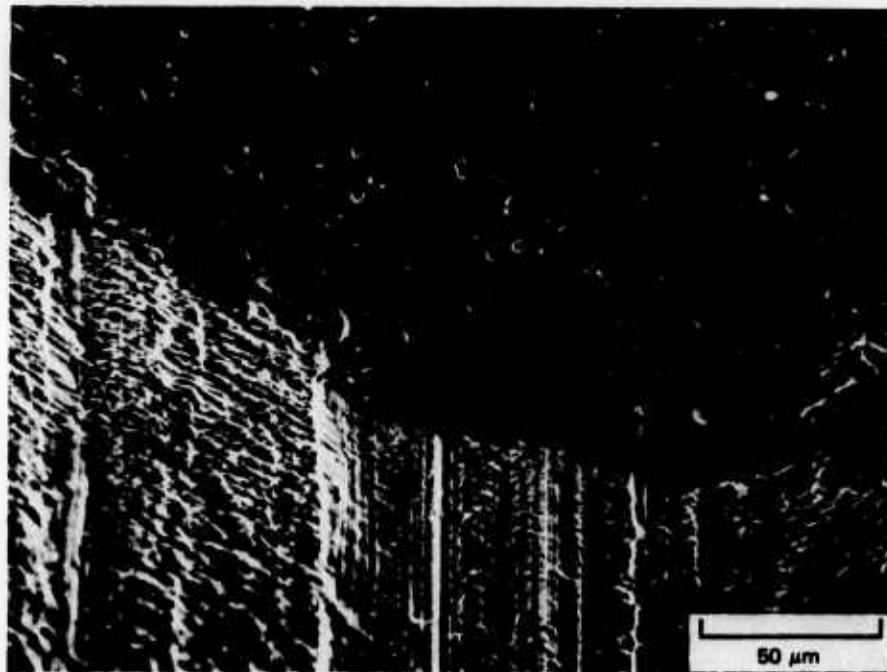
Part-through fatigue crack in a type-A wire of a titanium wire rope that was fatigue tested (Fig. 11)
